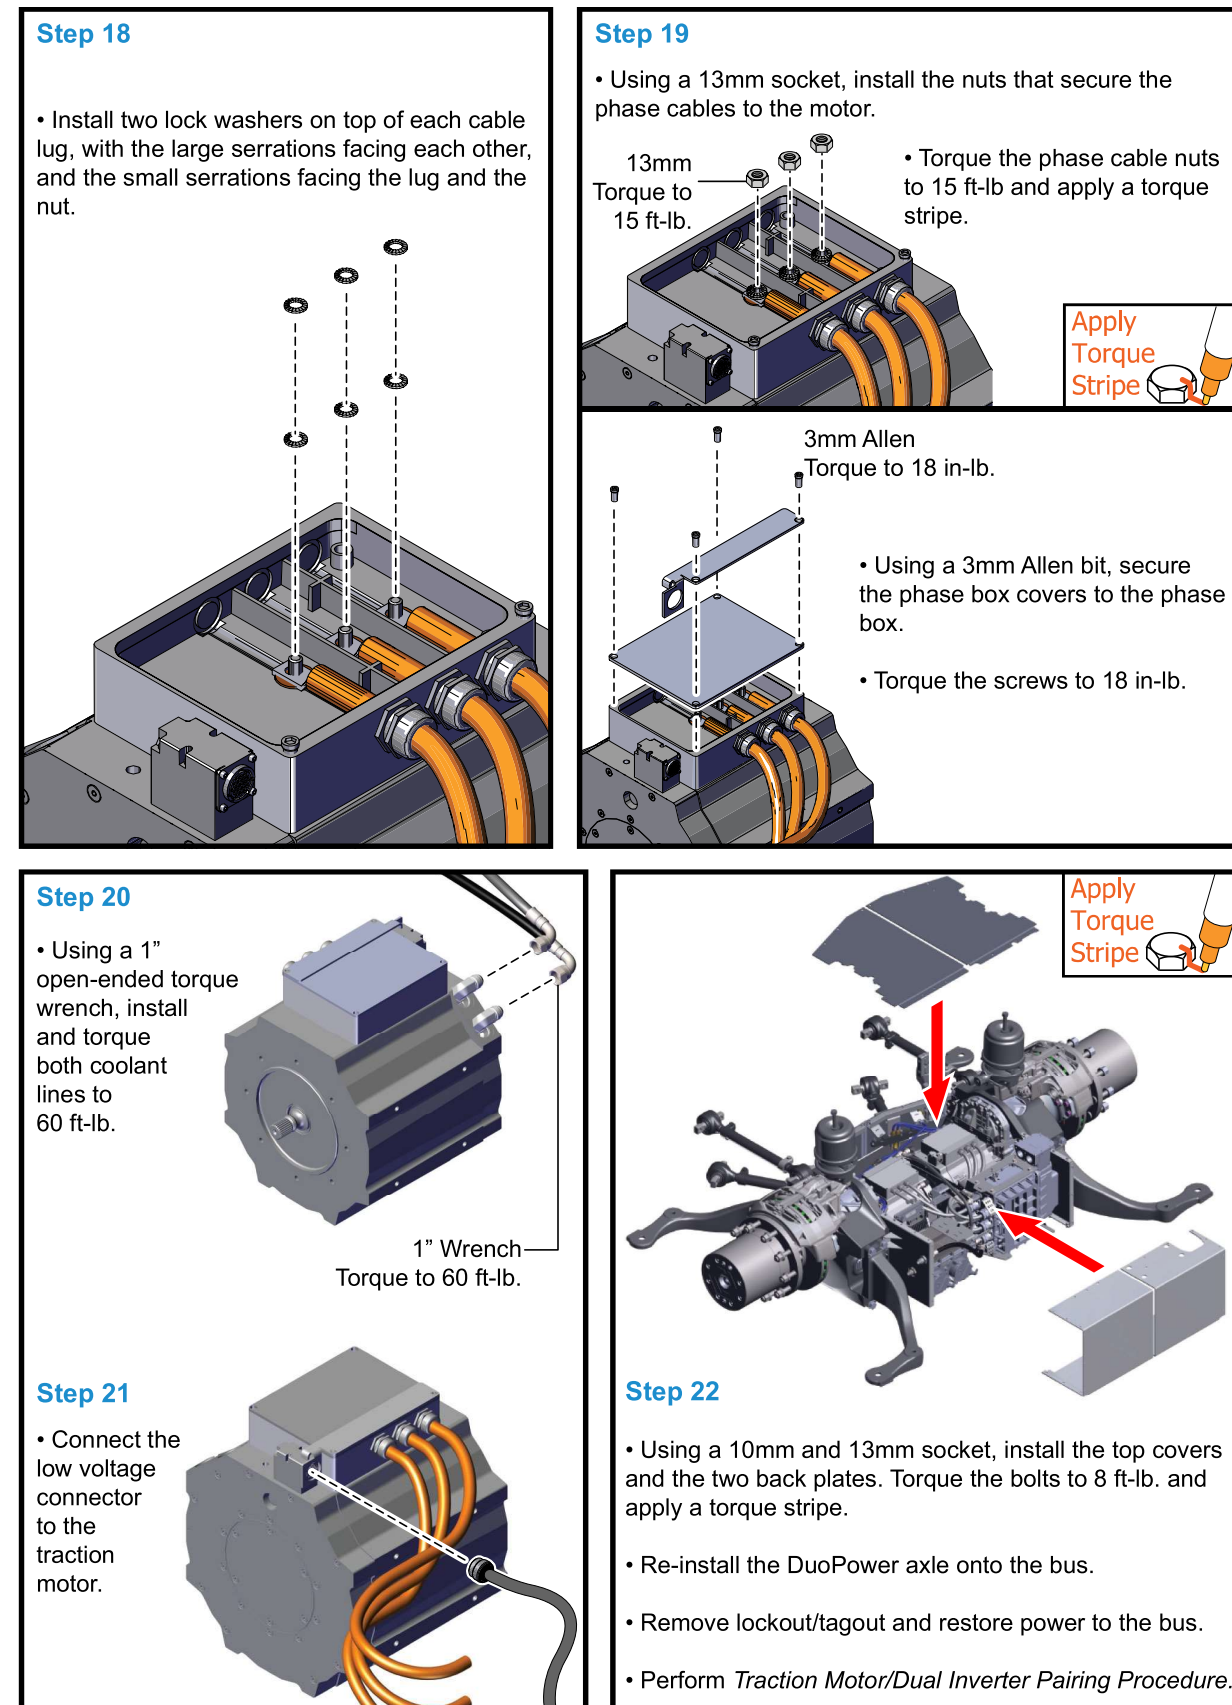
Traction Motor Removal and Replacement - 3 of 3
